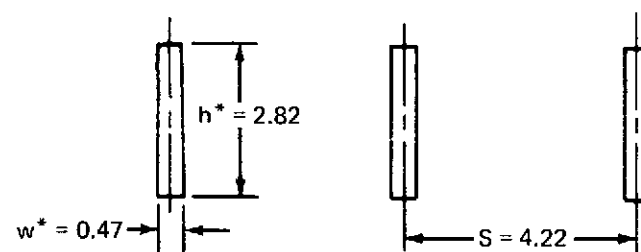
WING-DUCT NOZZLE ASSEMBLY DNA-1 DESIGN DETAILS
